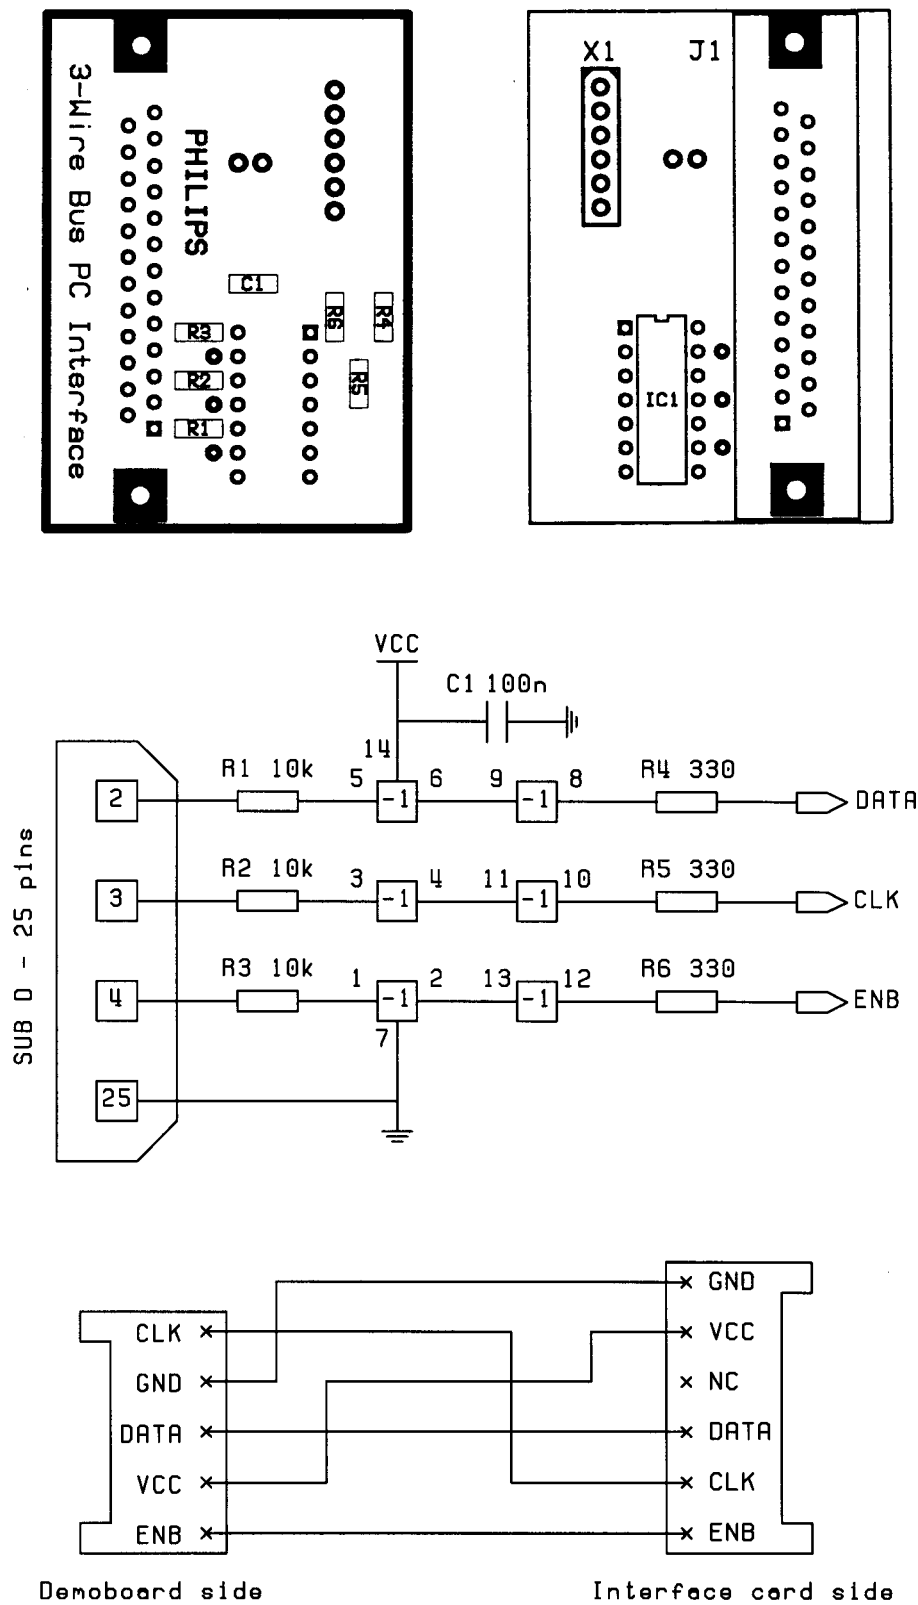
Interface Card pcb Layout and Cable Connection.
